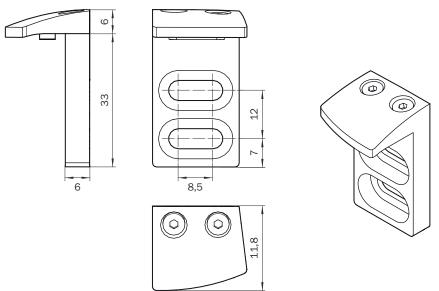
Dimensional drawing of L-Fix bracket (mm), part number 2045843 (kit)
